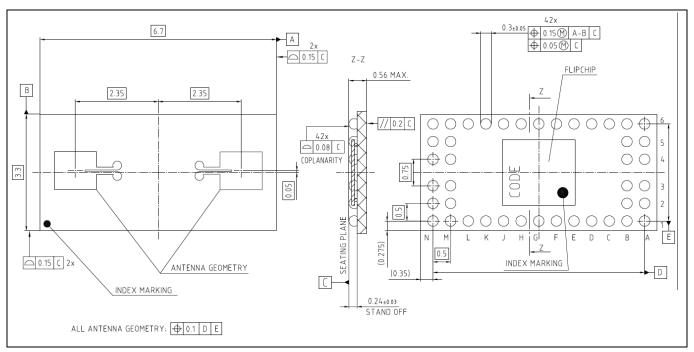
Top and side view of the BGT60LTR11AIP MMIC package – all dimensions in mm
